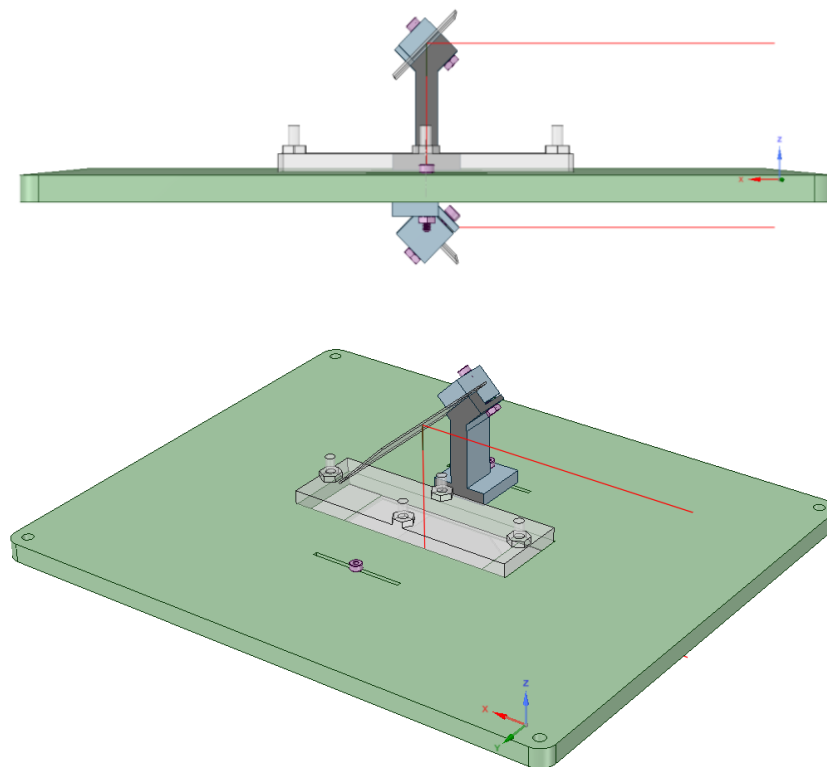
Initial CAD design of the modular microscope stage insert that would add laser diffractometry to conventional bright-field microscopy.
